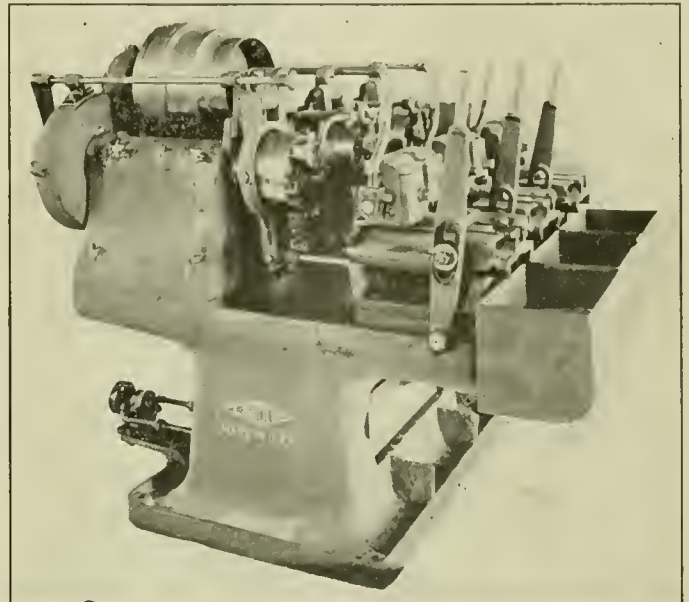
Thread-Cutting Machine Carriages Equipped with Vise Jaws
